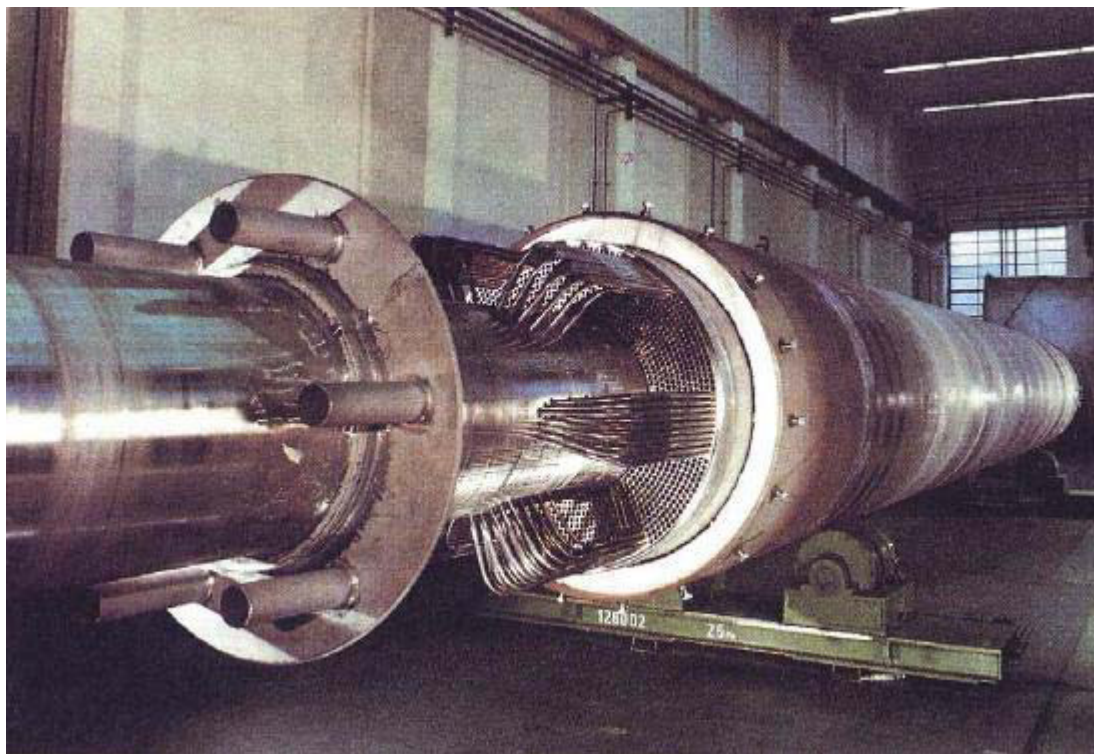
INX Component with U-tube bundle tested in KVK (Balcke-Dürr)
